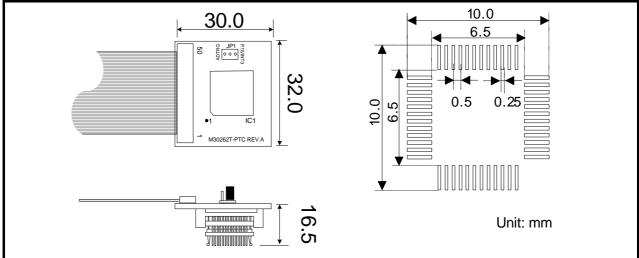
External dimensions of M30262T-PTC and sample foot pattern
